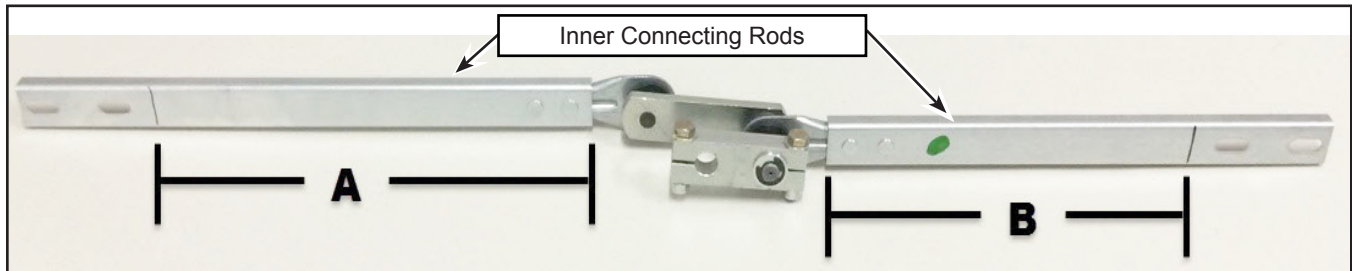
Transfer Dimensions A and B to the New Linkage Assembly
